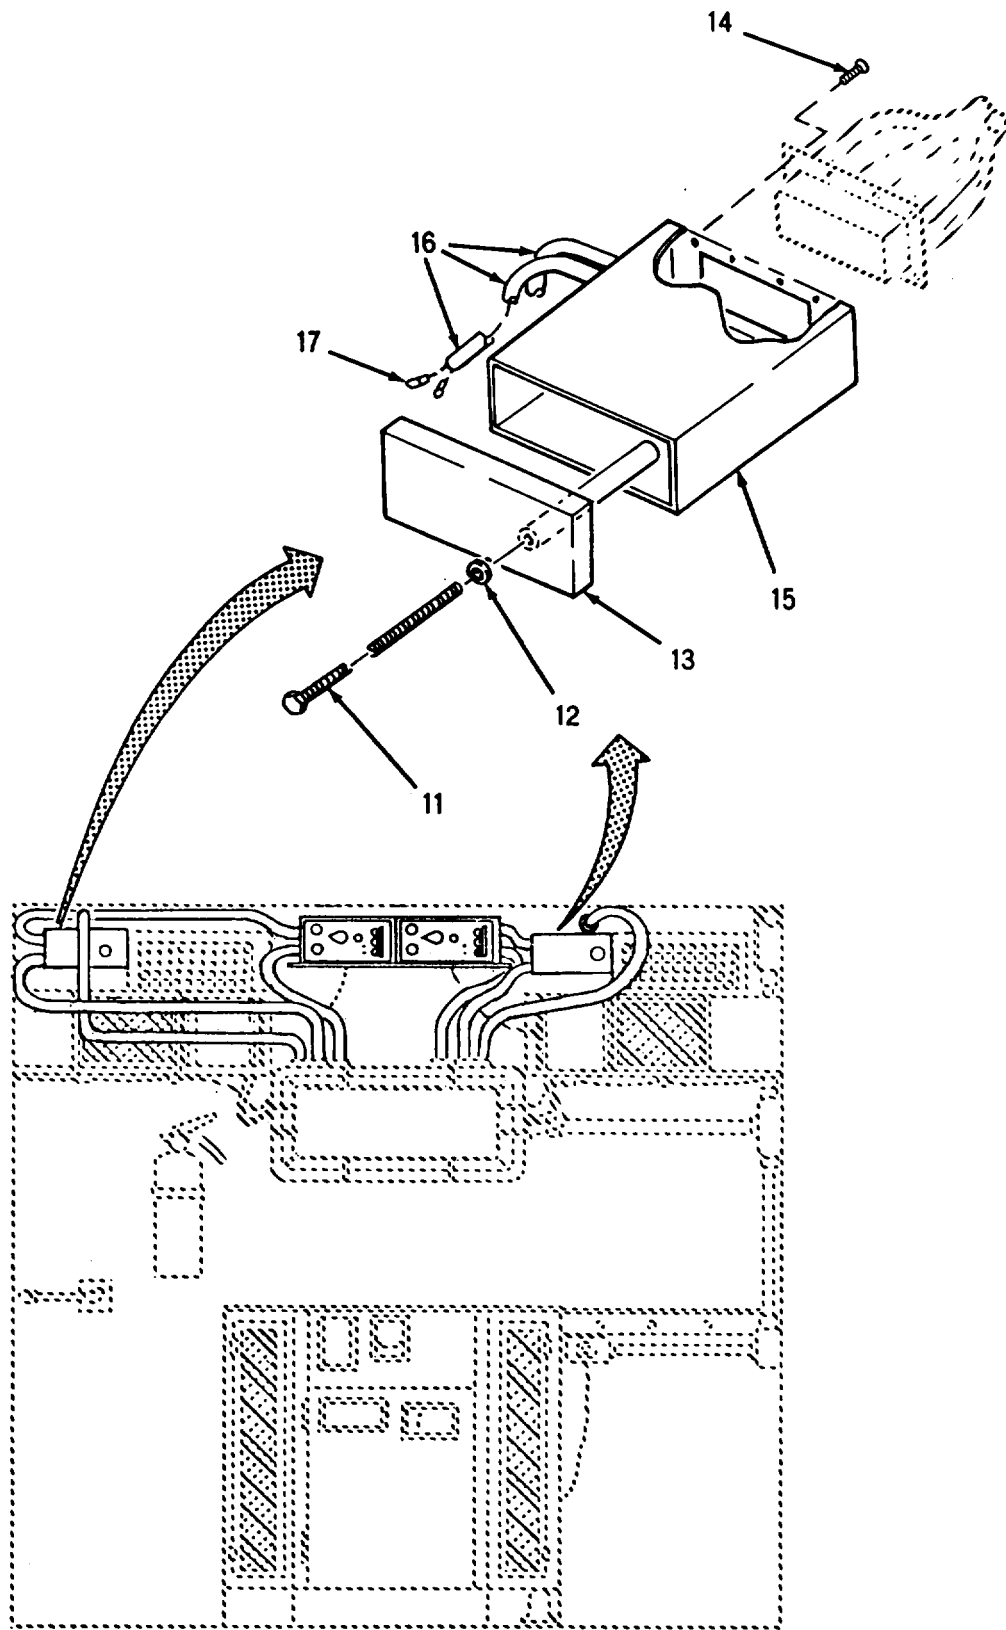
Environmental Control - Air Conditioner Control Assembly (Sheet 2 of 2)
